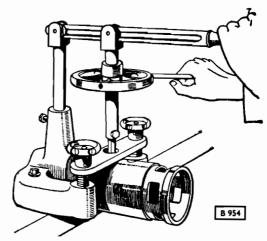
Wheel-operated screwdriver for tightening pole shoe fixing screws
